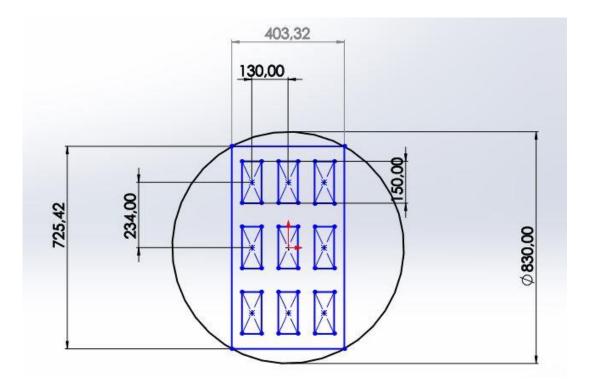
CYLINDER HEAD MACHINING, POSITIONING 1
